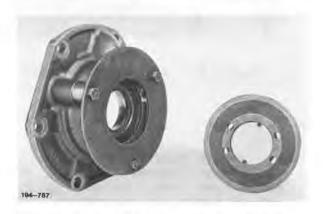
Main Drive Pinion Bearing Cover, Field Conversion
